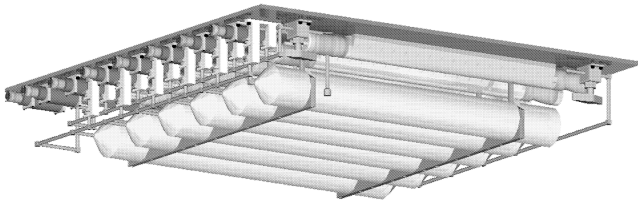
Compressor assembly for the 20 K sorption cooler (from [20]).
